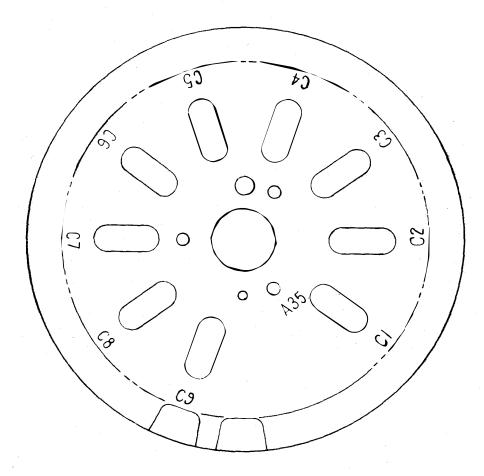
100 kHz Rotor Subassembly A2A4A35, Component Locations
